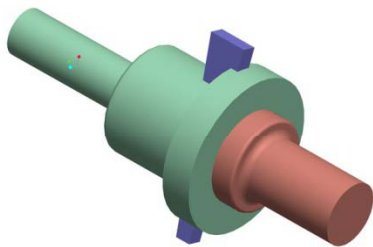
STEEL SPIGOT BREAKING IN TENSION OUTSIDE THE JOINT
